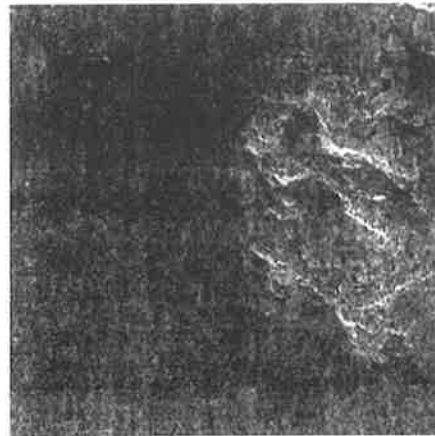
Fretting marks on the outer surface of the bearing close to the oil groove.
